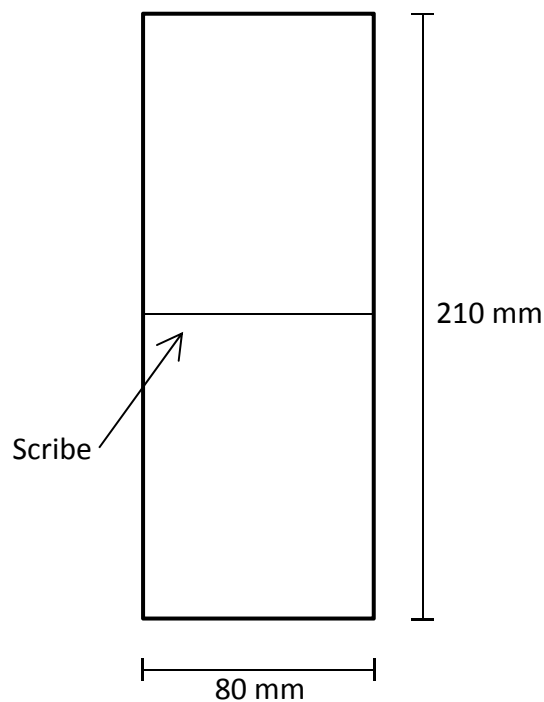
Rectangular specimen used for four point bend fatigue tests
